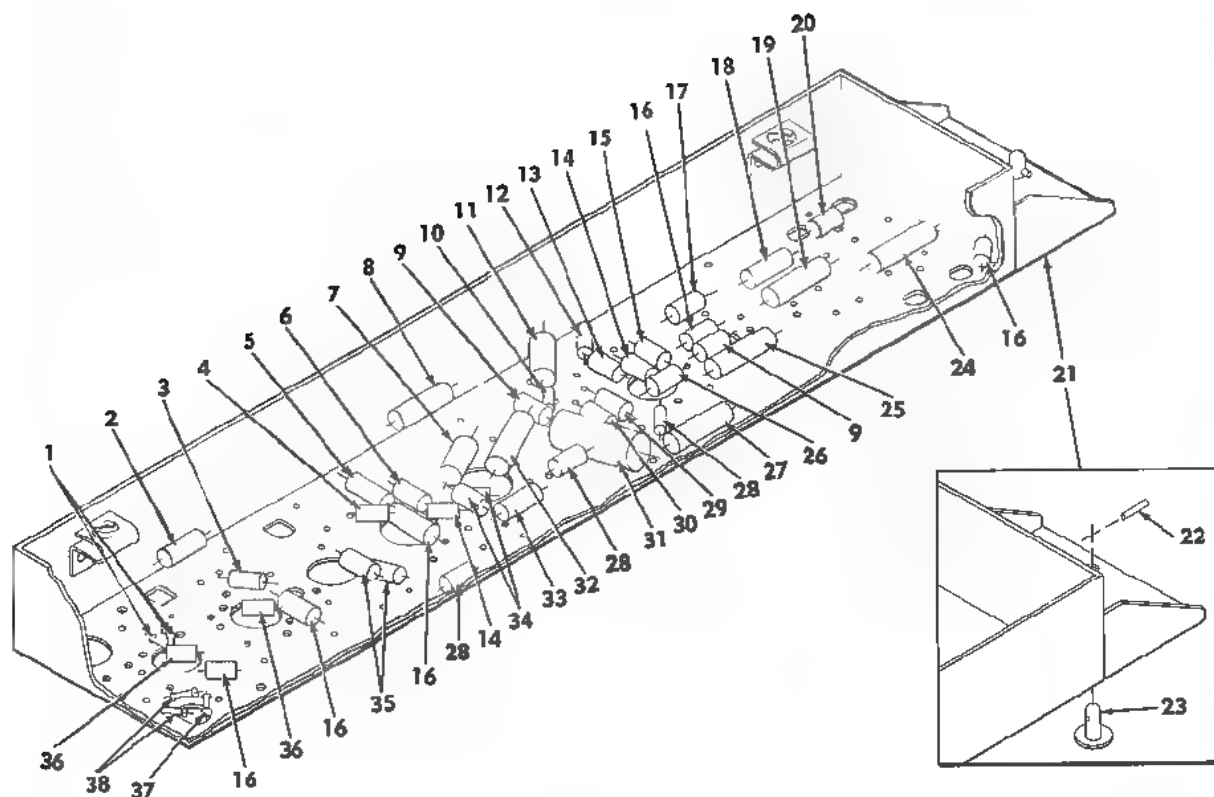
CONTROL, RECEIVER C-14968/M /8607339/-PARTIAL EXPLODED VIEW
